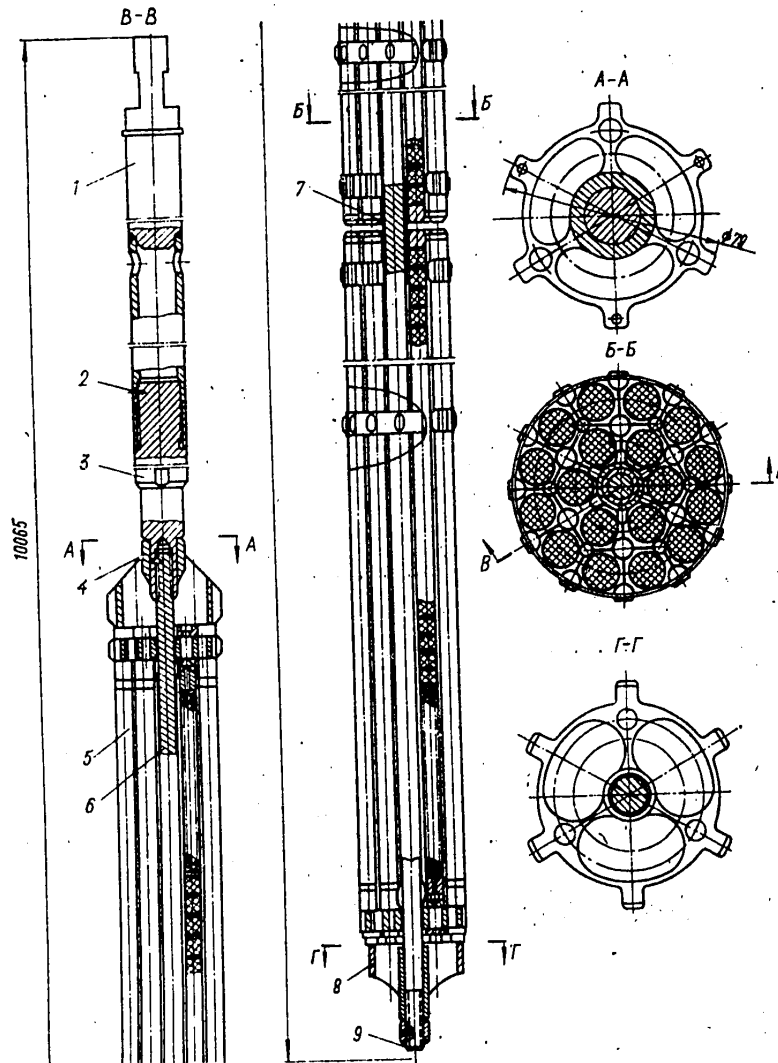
Fuel Assembly of RBMK: 1--suspension; 2--pin; 3--adapter; 4--shank; 5--fuel element; 6--carrier rod; 7--sleeve; 8--end cap; 9--nuts
